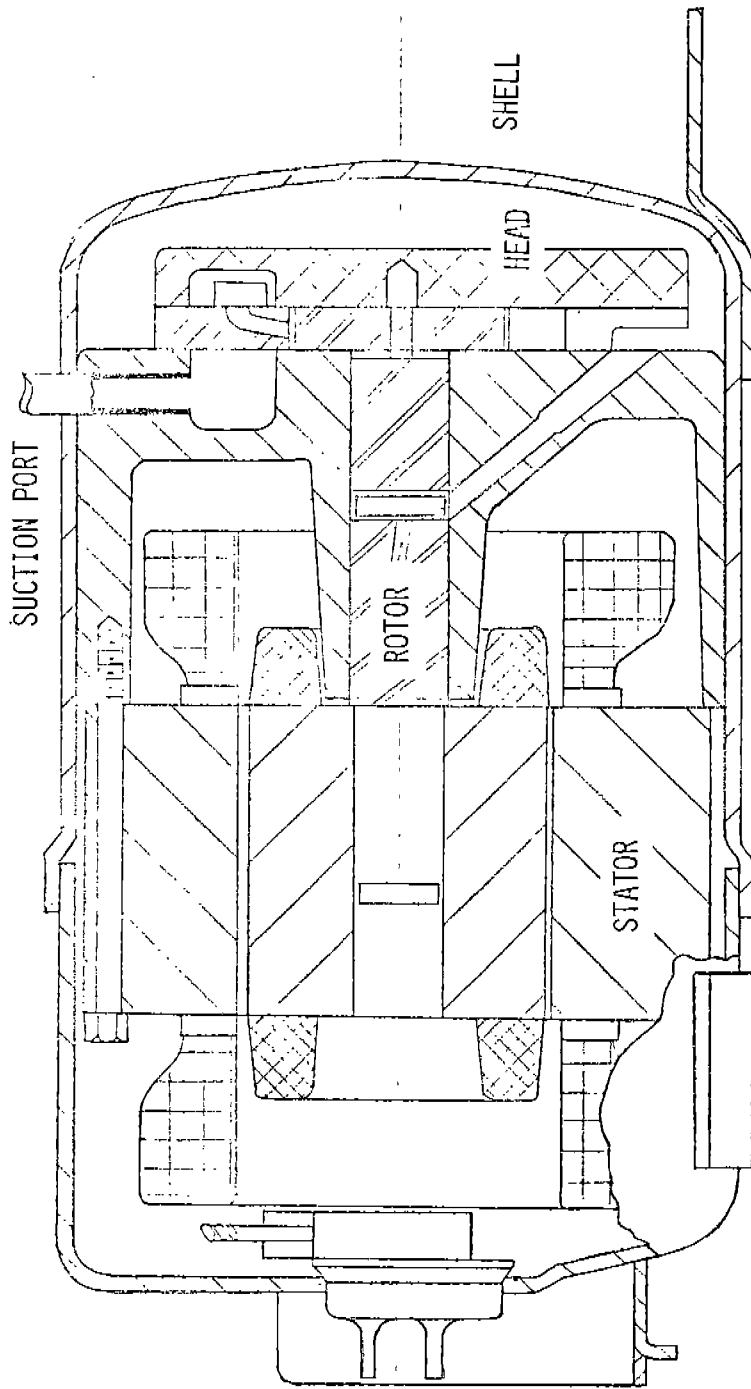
FIGURE I. CUTAWAY DRAWING OF STOCK COMPRESSOR.
